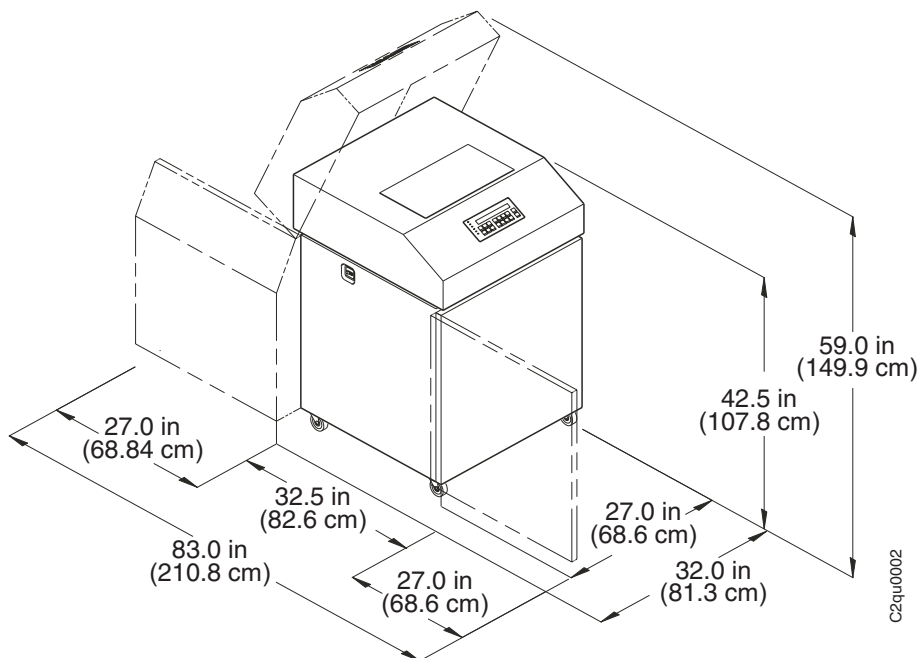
Exploded View of Cabinet Model with Power Paper Stacker Printer Dimensions
